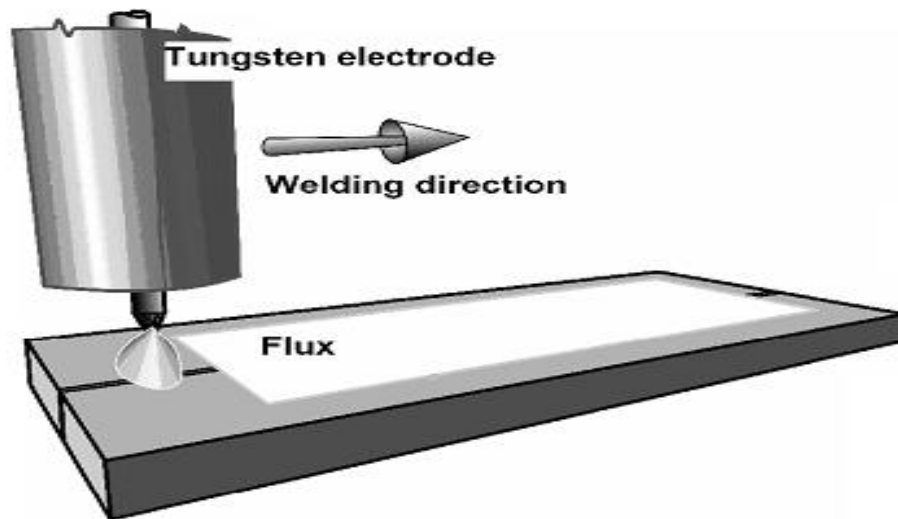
Schematic Diagram A-TIG Welding Process [15]
